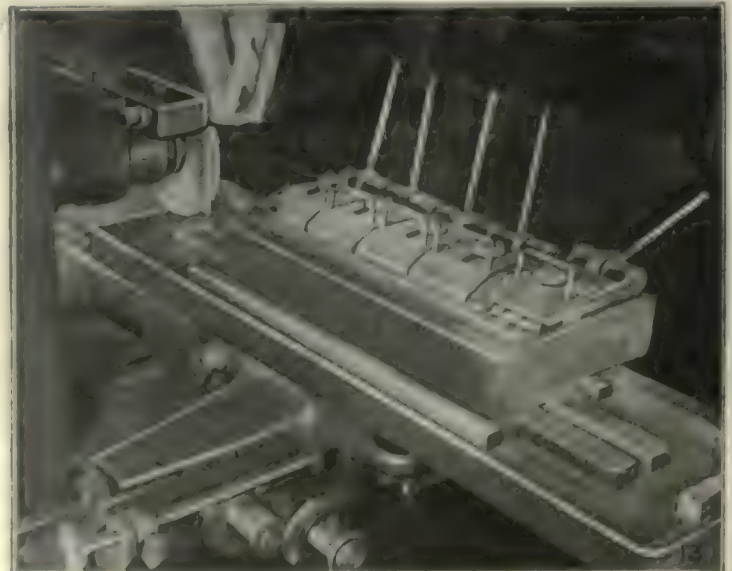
MILLING CUTTING EDGE AND BEVELING HEEL. FIG. 13—GRINDING THE CUTTING EDGE
